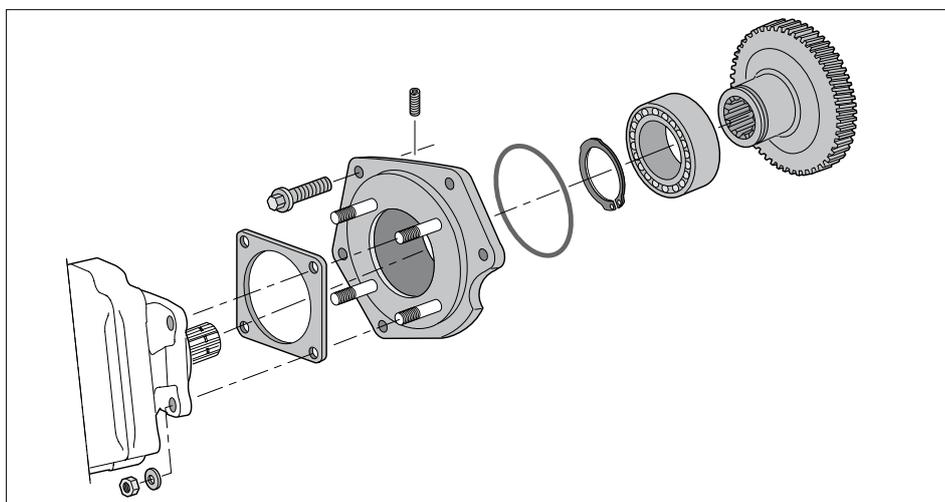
VP1-045/075 shown with a bearing supported gear on an engine PTO adapter (example).
